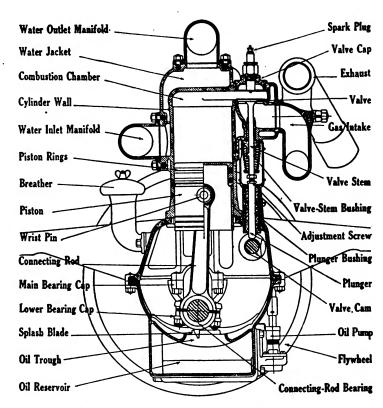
SHOWING A CROSS-SECTION OF THE MOTOR WITH VARIOUS PARTS NAMED
